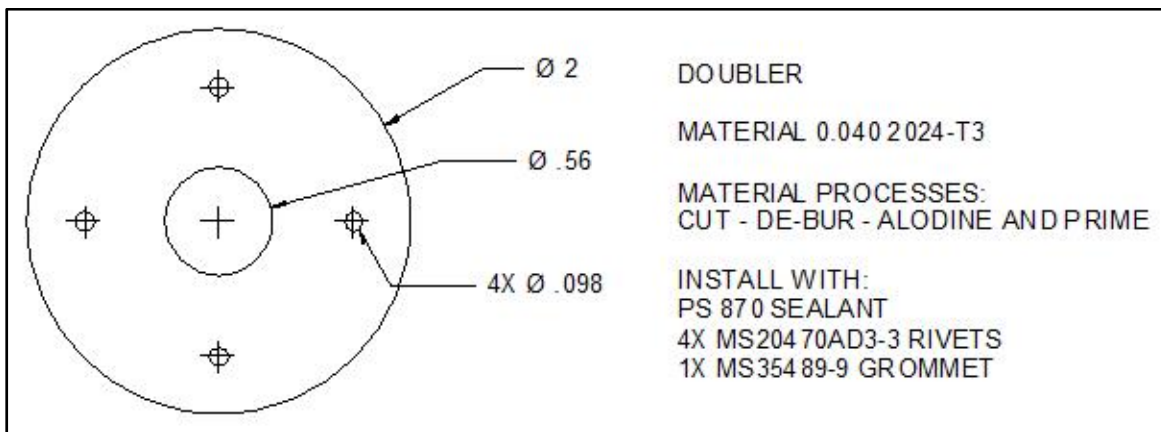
Seal/pot composites A/R per Bell procedures. Coat/seal contact surfaces of inner and outer doublers with PS 870. Reference TD02840 for plug and door attachment.
